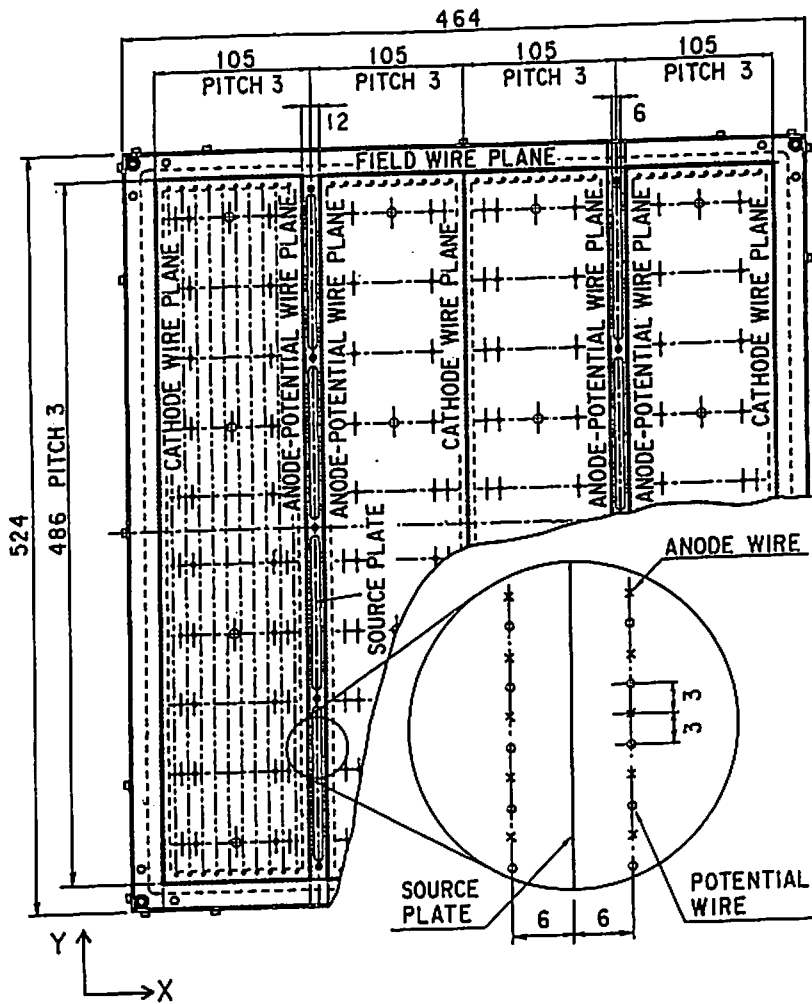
Configuration of the wires and the source plates for a chamber module of DCBA[9]. Scale unit in the drawing is in mm.
